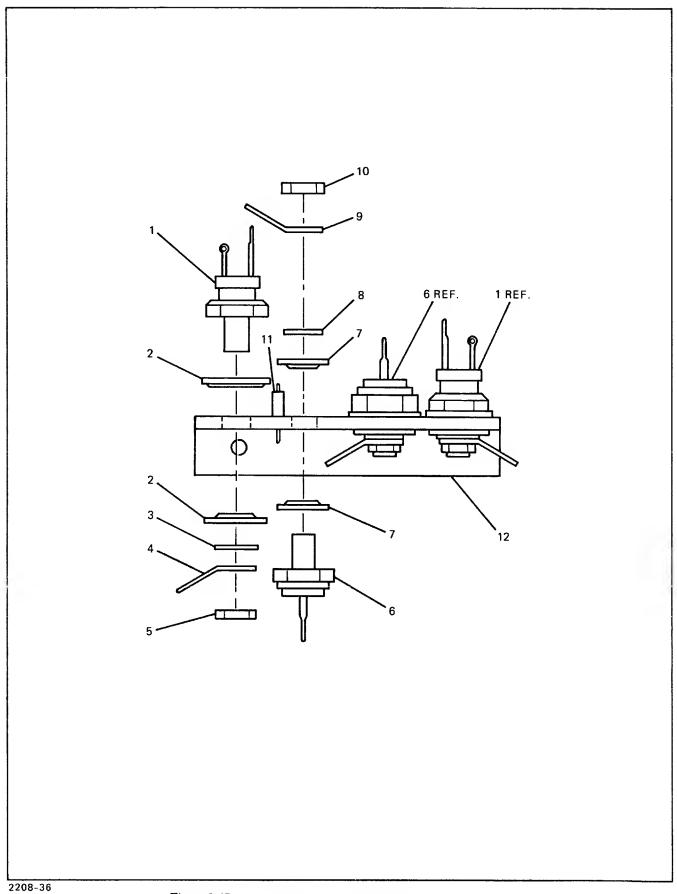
Output Crowbar Assembly (A13), Exploded View
